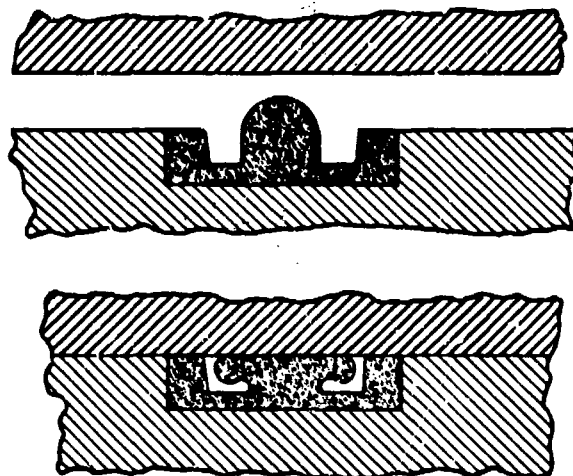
Operation of Molded Shape Gasket
